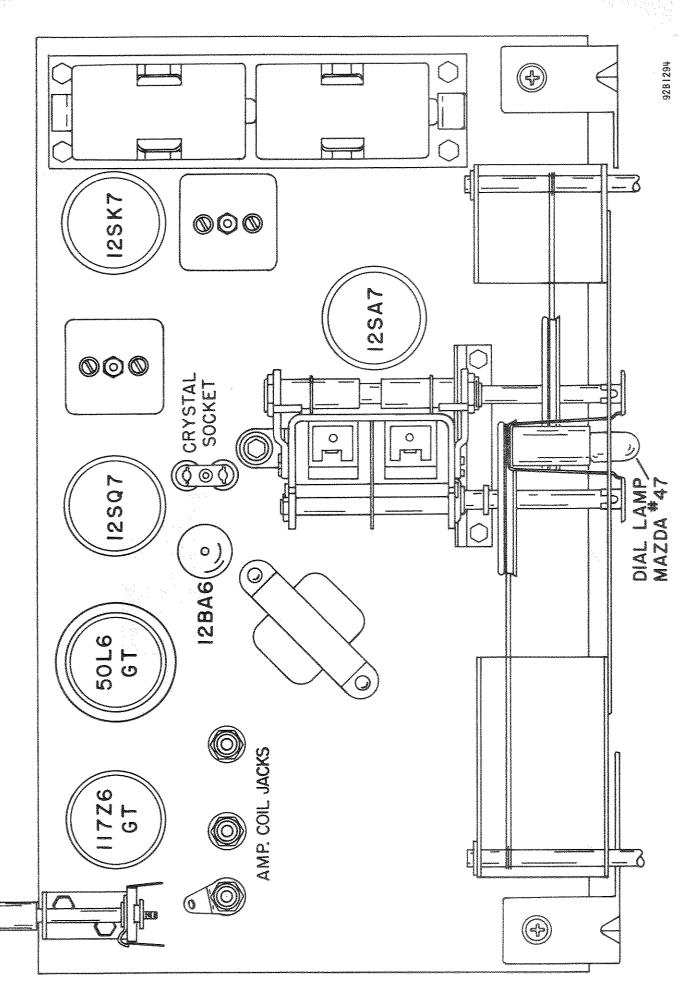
TOP VIEW, LOCATION OF TUBES, DIAL LAMP, CRYSTAL SOCKET AND AMP. COIL JACKS
